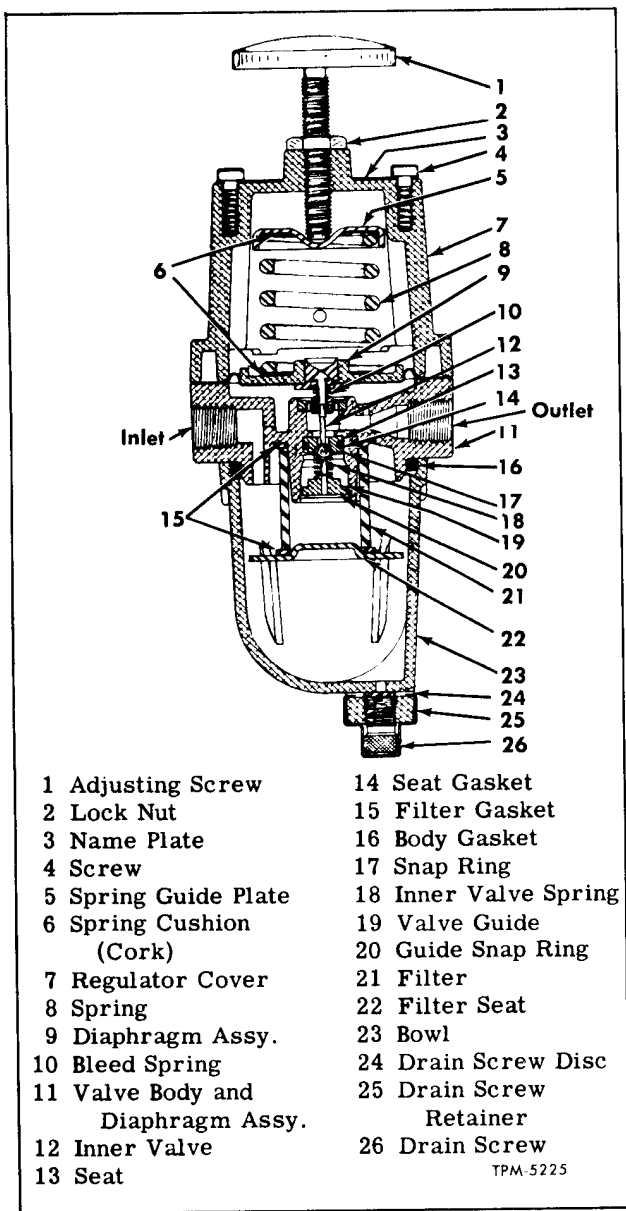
Air Pressure Regulator Valve Assembly (Standard Controls)
